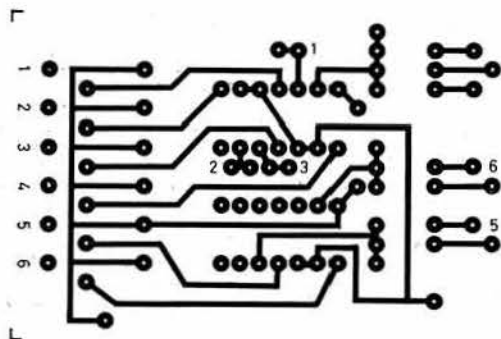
Voltage control board-track layout, double-sided board. All holes enlarged on other side except where required for grounding
